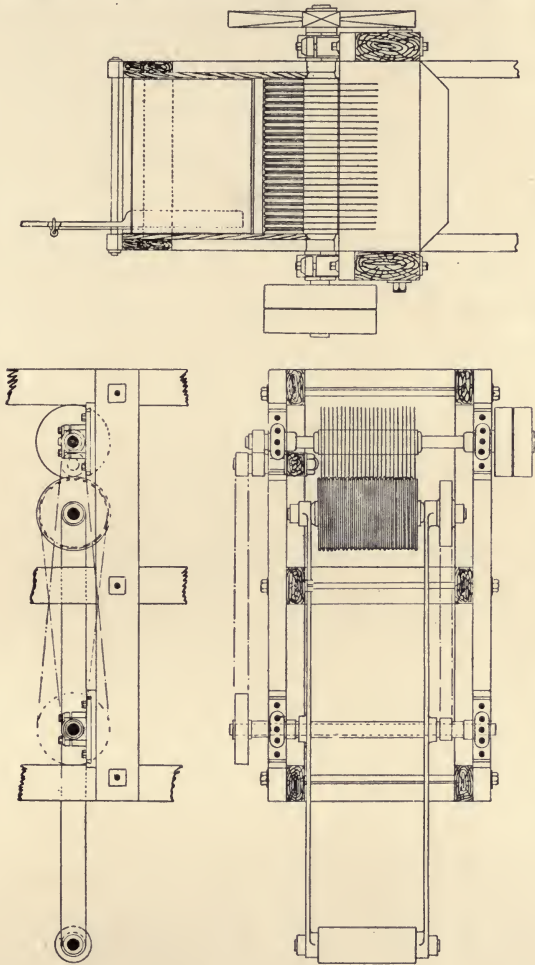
Higginbottom-Lennox Patent Peat Mincing or Disintegrating Machine.
